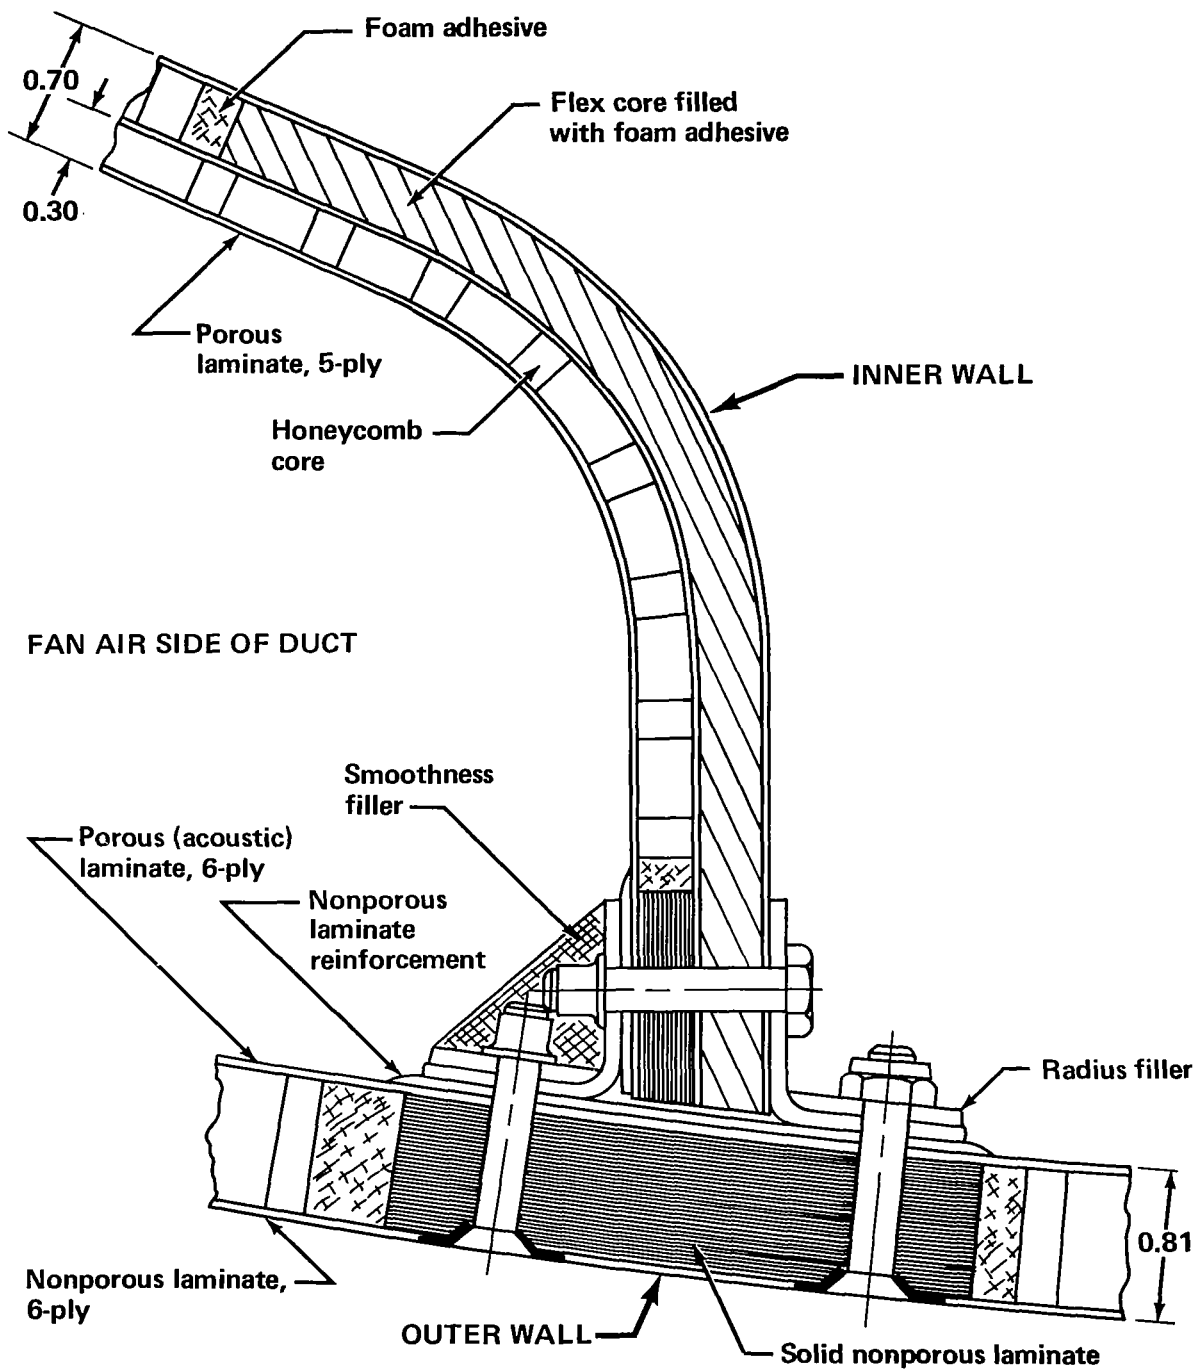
WRAP COWL DUCT LOWER JOINT, INNER AND OUTER WALL PANELS
